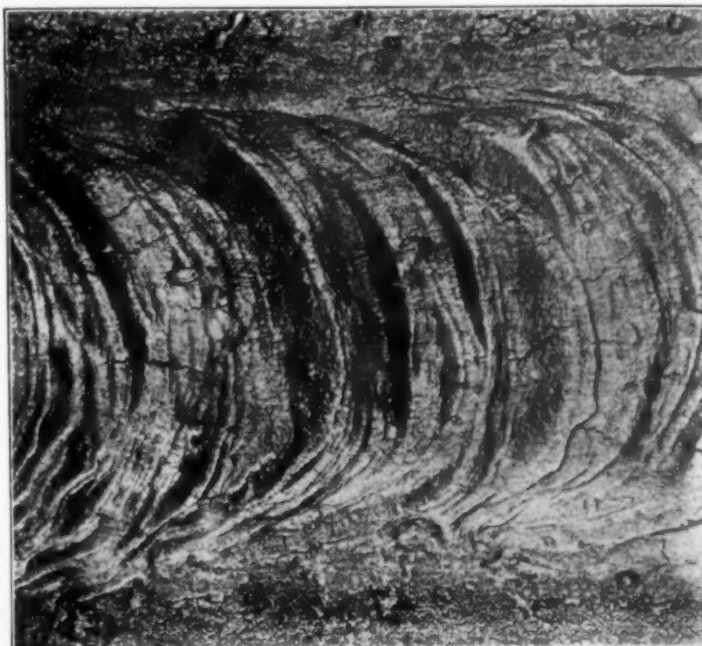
CRACKS IN WELD AND PLATE AFTER 50,000-LB. TENSILE LOAD FAILED TO BREAK TEST PIECE. SCALE PICKLED OFF BEFORE TAKING PHOTO; MAGNIFICATION 3.6
